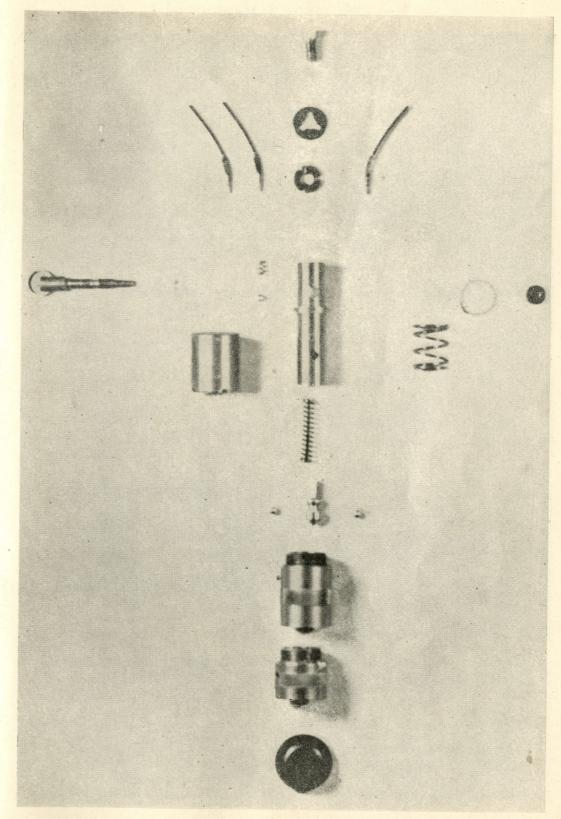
Figure VI. Igniter Pressure Type S.M.i., Z. 35, For S. (Shrapnel) Mines, Parts
